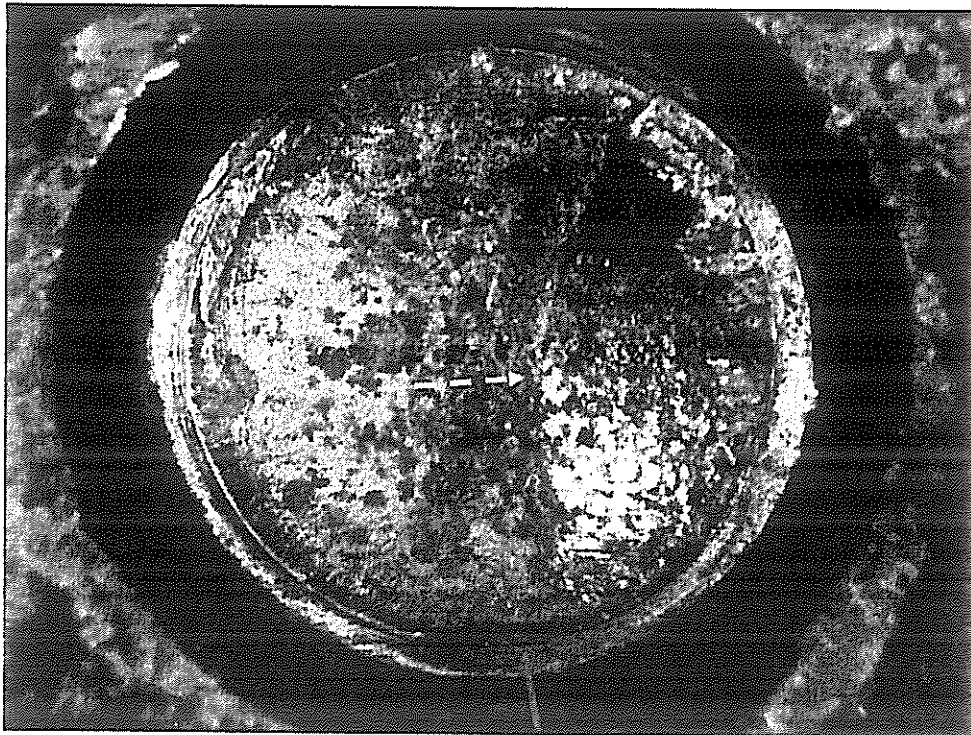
Bolt 8 – fracture features revealed that breakage originated in unidirectional bending fatigue near the inner diameter, but the direction of propagation changed
